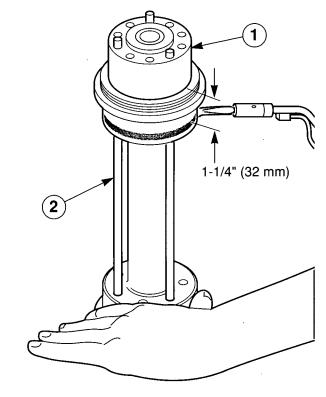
Installing remaining bearing block. (1) Bearing Block, (2) Installation Rod.
